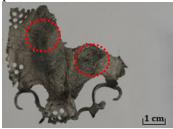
Cast of a frame bracket prosthesis with a visible casting defect in the form of blisters
